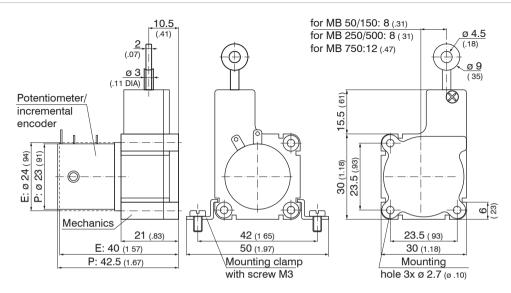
Dimensional drawing WPS- ... -MK30 with potentiometer or encoder, dimensions in mm (inches), not to scale
